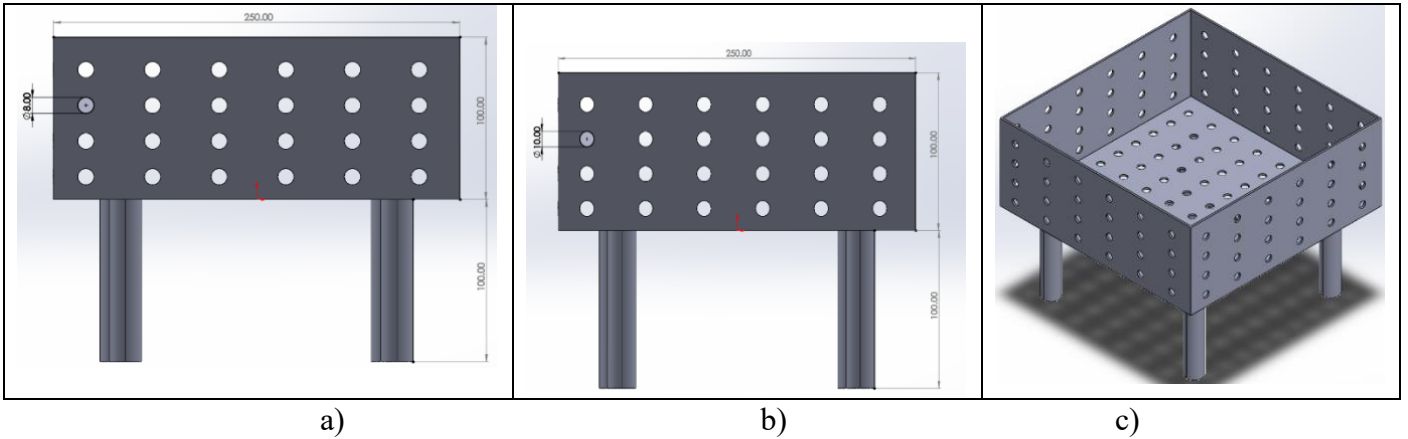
Three-dimensional design a) 8 mm dimensioning, b) 10 mm dimensioning c) perspective view
